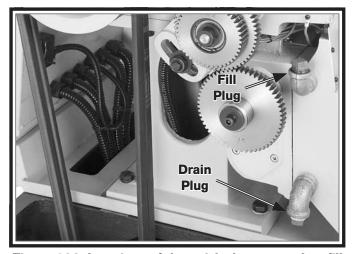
Locations of the quick-change gearbox fill and drain plugs.
